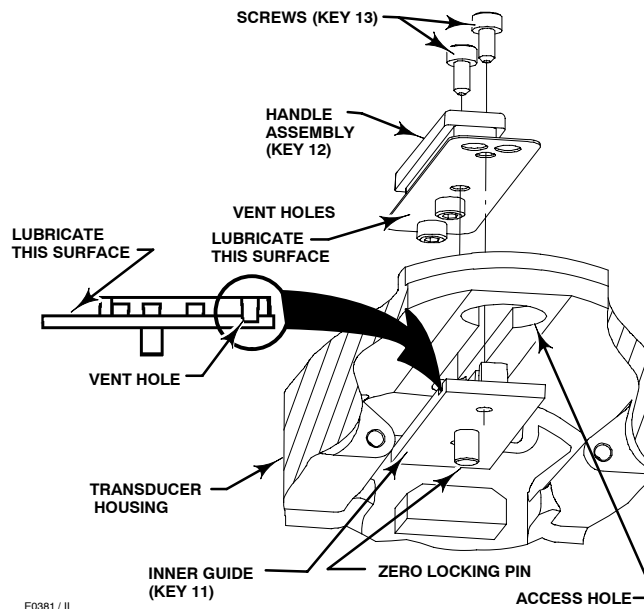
Installing Inner Guide and Access Handle Assembly
